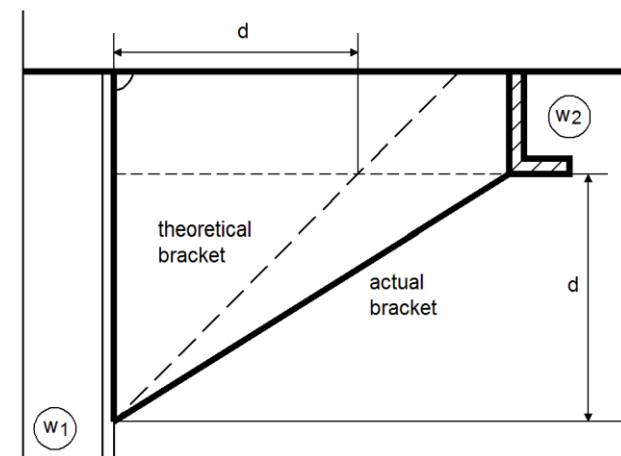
Connections of stiffeners located in perpendicular planes
